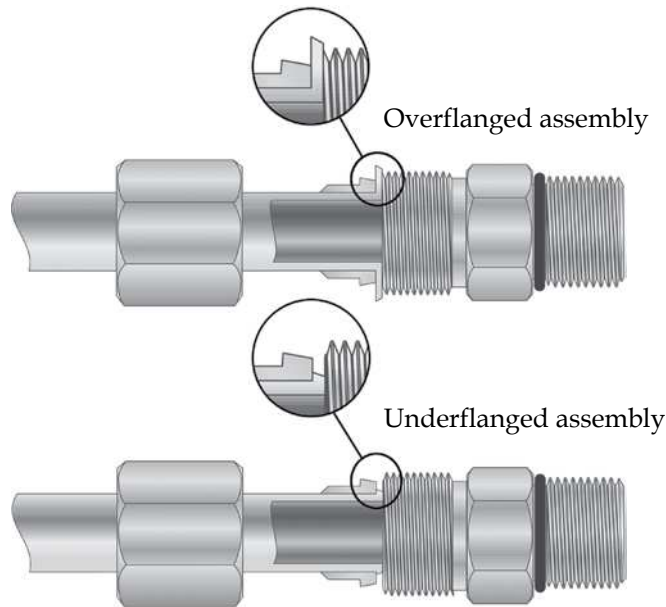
Over-flanging and Under-flanging failures. Source: Assembly/Installation section of [64].
